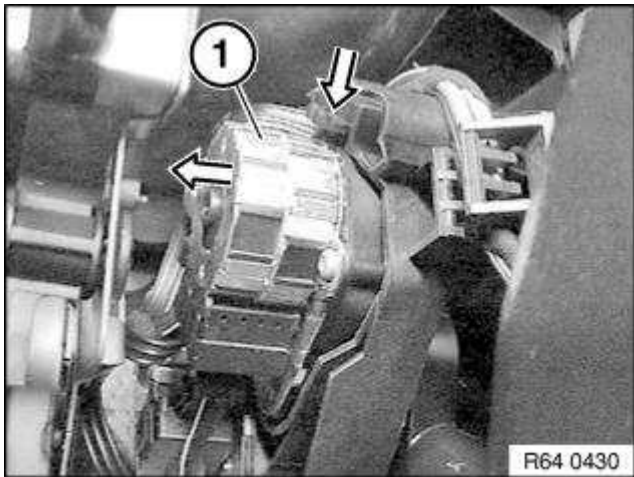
Unlock Actuator Drive (1) And Feed Out Towards Side
